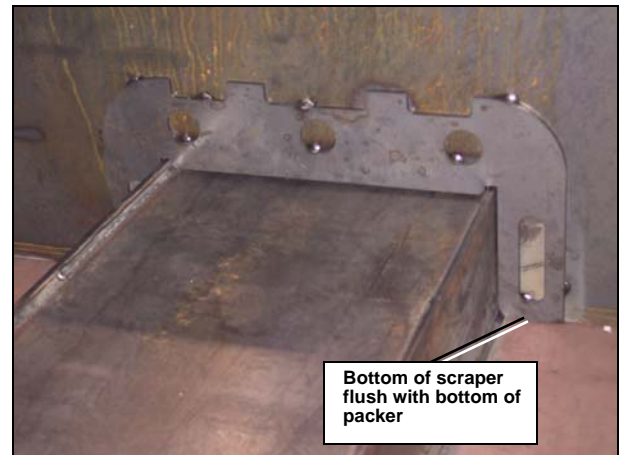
The bottom of the scraper must be flush with the bottom of the packer
